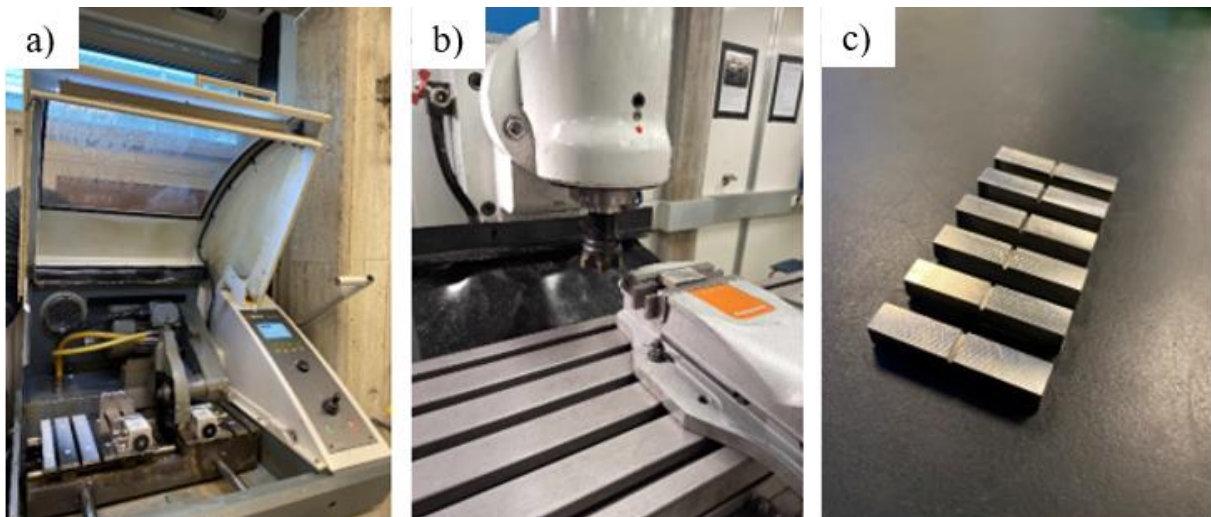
a) Struers Discotom-10, b) milling of charpy specimens and c) charpy specimens
